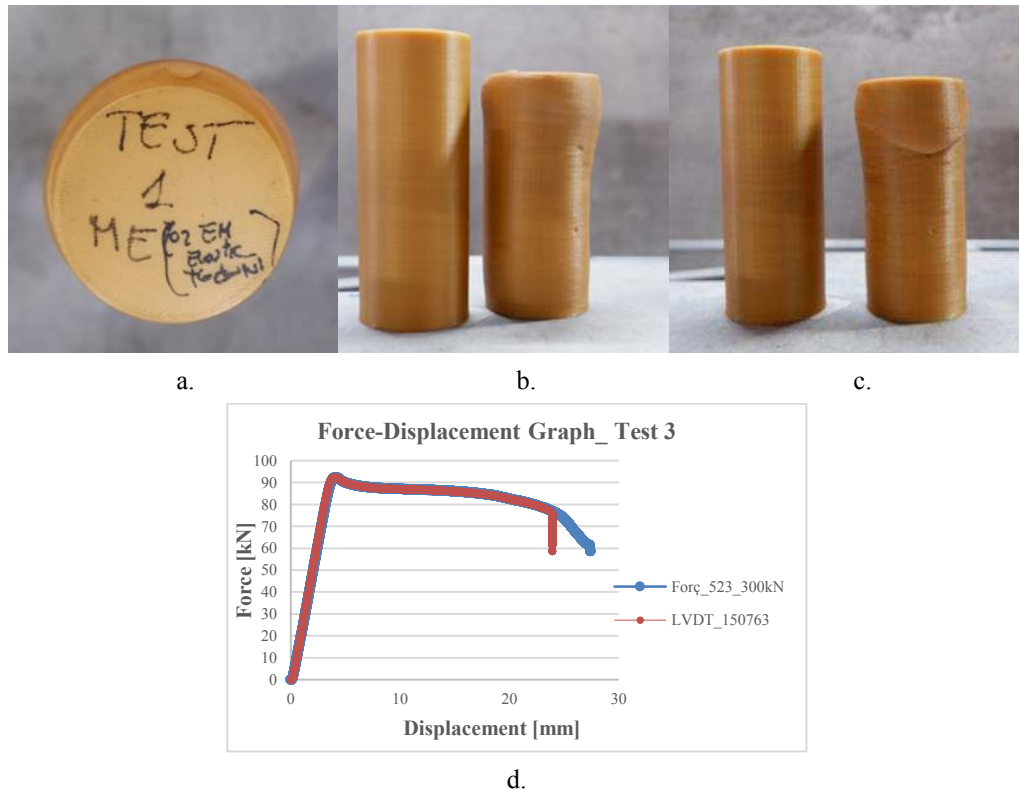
Test 3: a. Top view deformed specimen; b. Later view 1 deformed specimen; c. Lateral view 2 deformed specimen; d. Force-Displacement Graphs.
